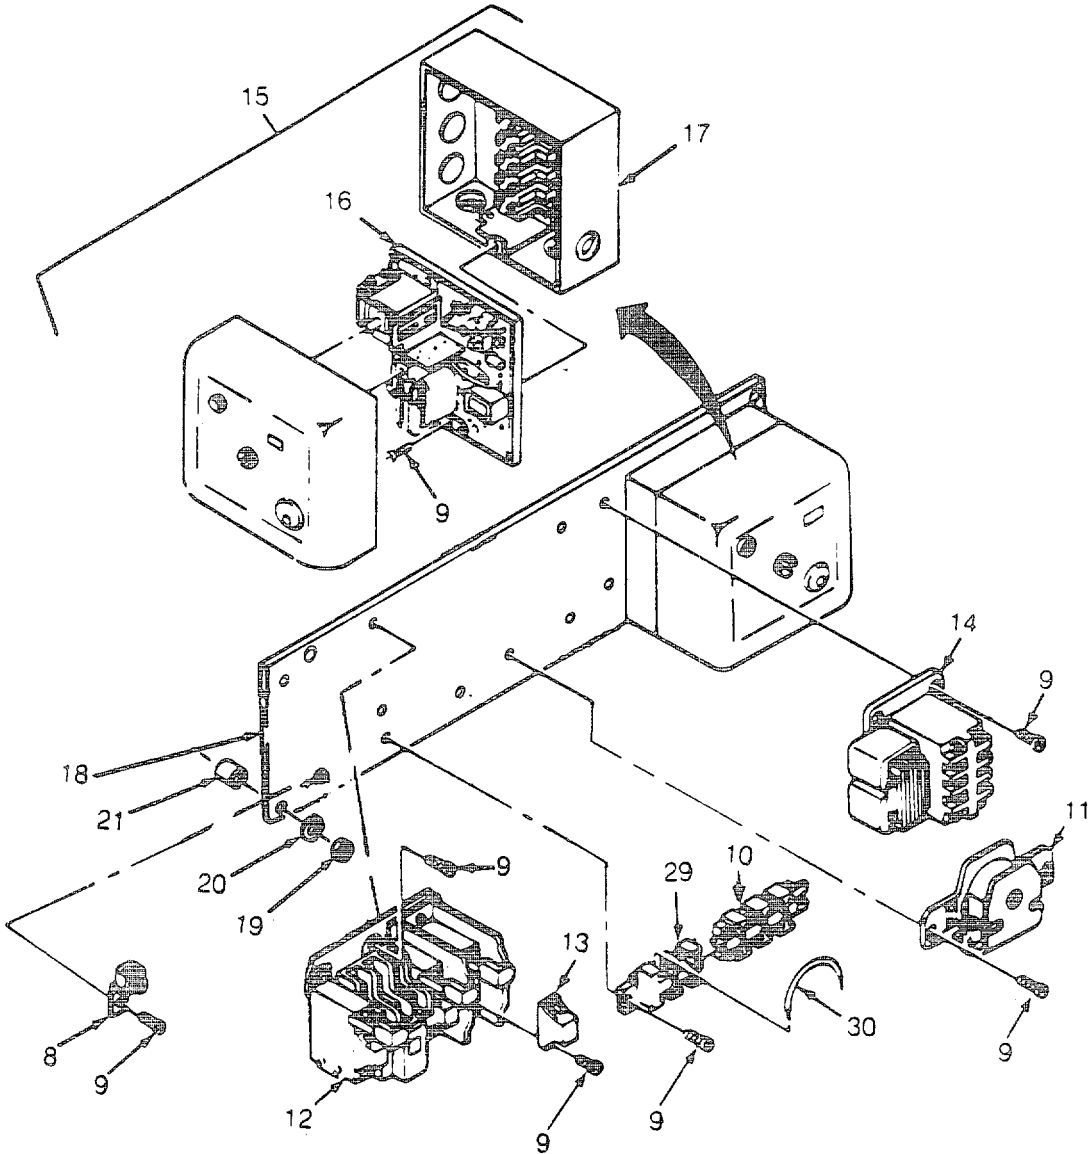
Water Heater Electric Control Assembly (Sheet 2 of 2)
